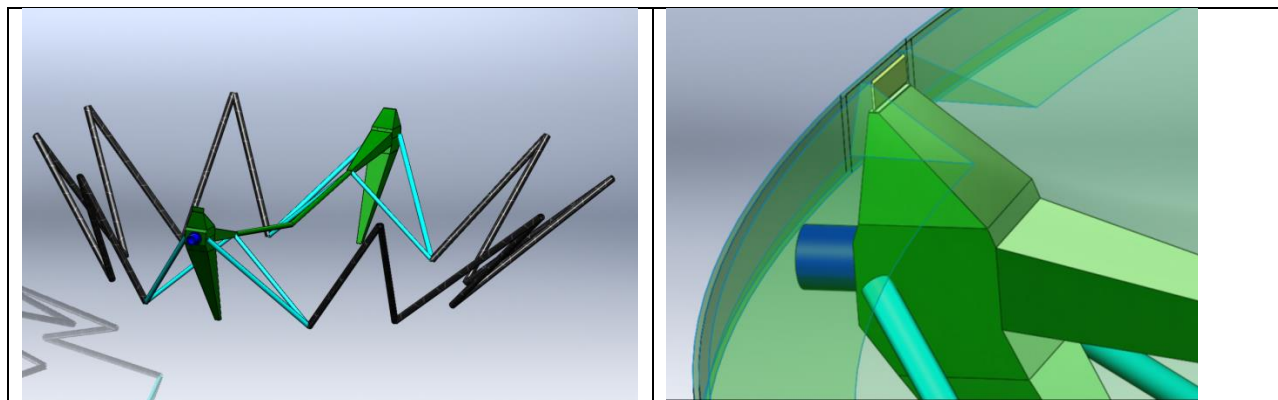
LHS, The Outer Back Structure, RHS, the Shear Connection at the Elevation Support Structure.
